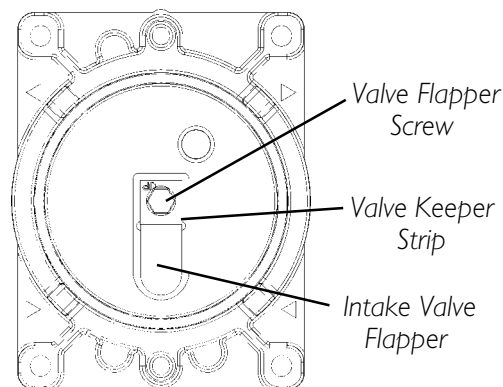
INSTALL O-RING, INTAKE VALVE FLAPPER AND VALVE KEEPER STRIP
